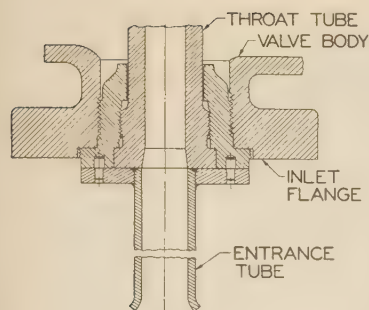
ASSEMBLY OF THROAT TUBE IN 2 1/2-IN. TYPE 1555, CONSOLIDATED SAFETY VALVE
